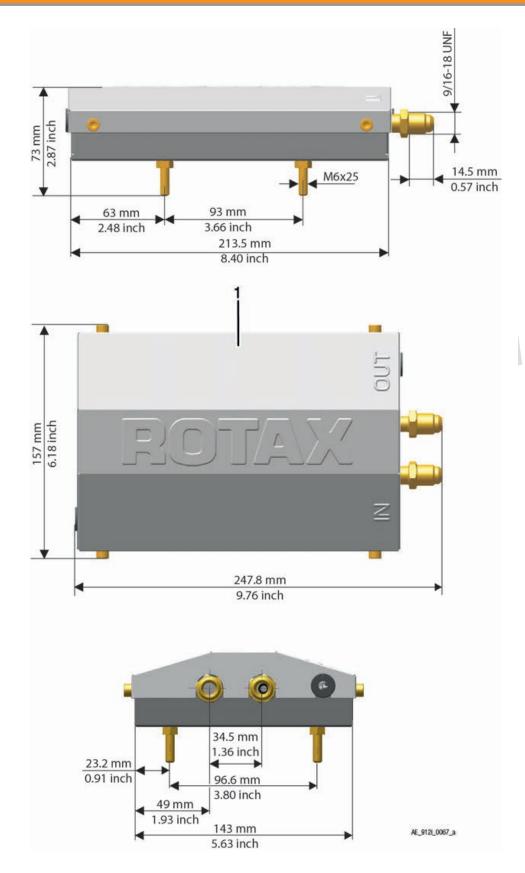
Dimensions: Fuel pump Connection 9/16–18 UNF
